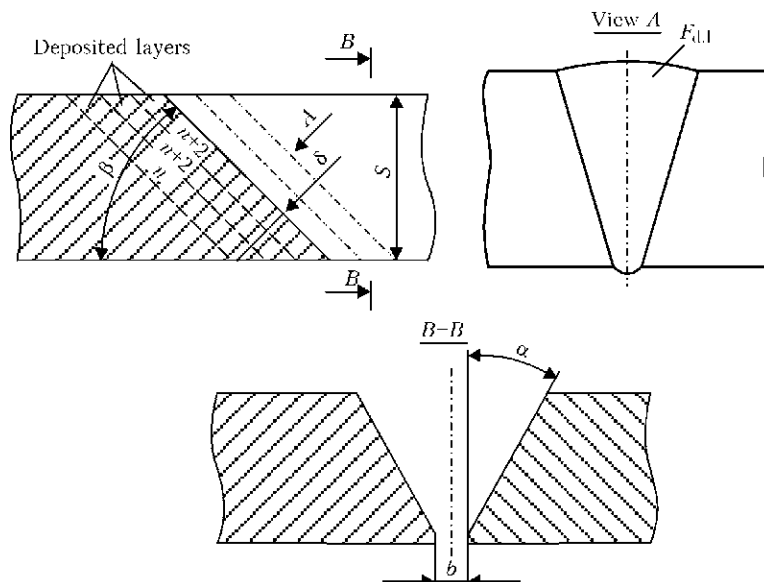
Deposited layers as weld composition parts formed by the «cross-hill» method (for designations see the text)
